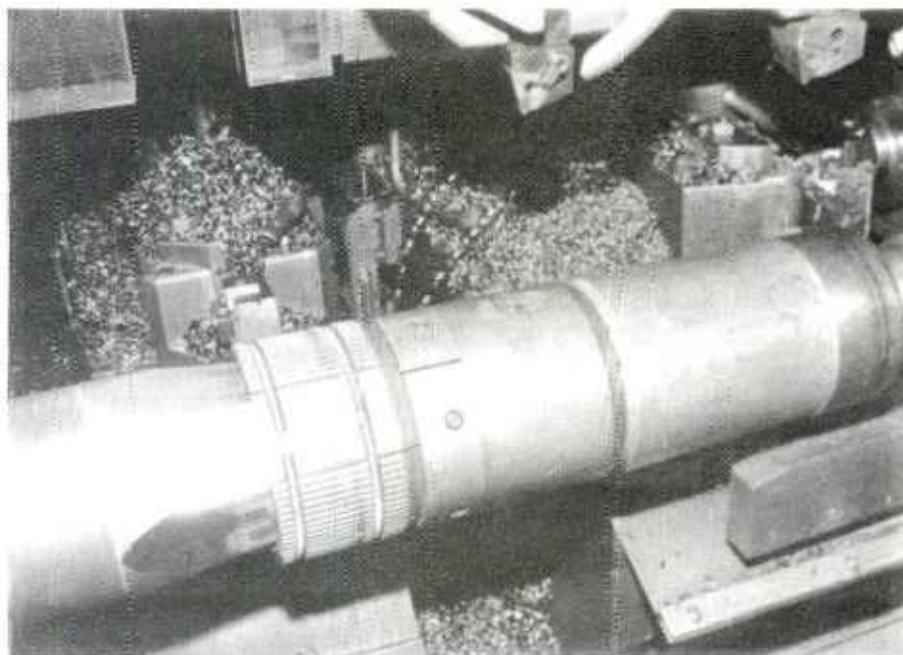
View overlooking top of machine mandrel displaying parting (left) and facing tools (right).
